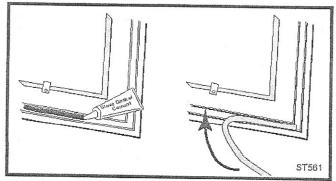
Lay a bead of gasket cement then press gasket in place.
